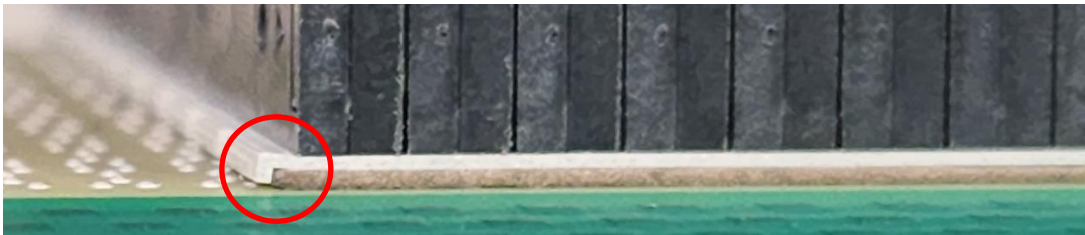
PCB gap inspection location (Paladin Plus only, rear view)
